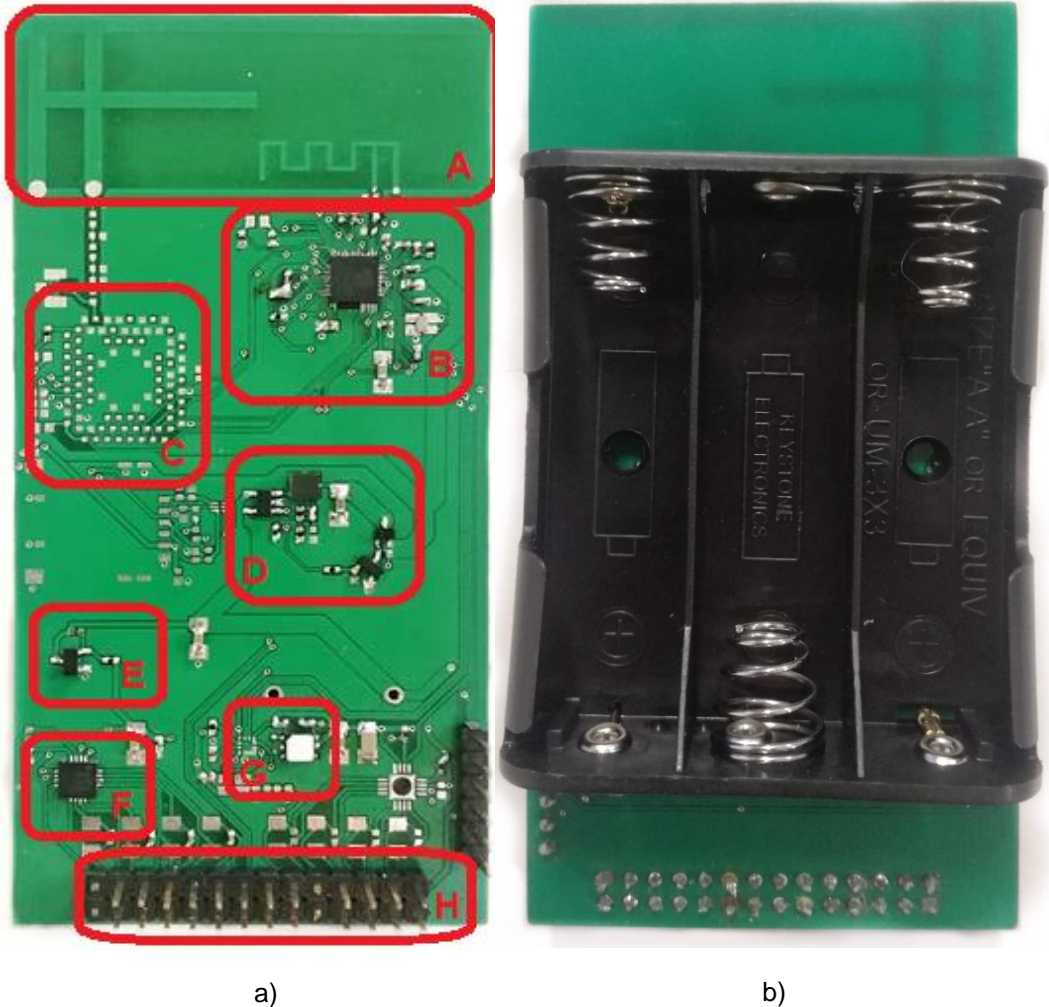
Main Board PCB top layer (a) and bottom layer (b)
